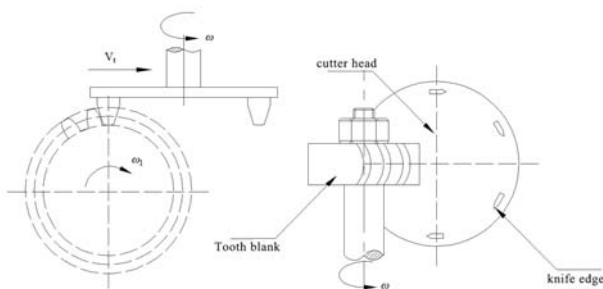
THE SCHEMATIC DIAGRAM SHOWS THE VARIABLE HYPERBOLIC CIRCULAR ARC TOOTH LINE CYLINDRICAL GEAR MACHINED BY DOUBLE-EDGED MILLING OF LARGE CUTTER HEAD
